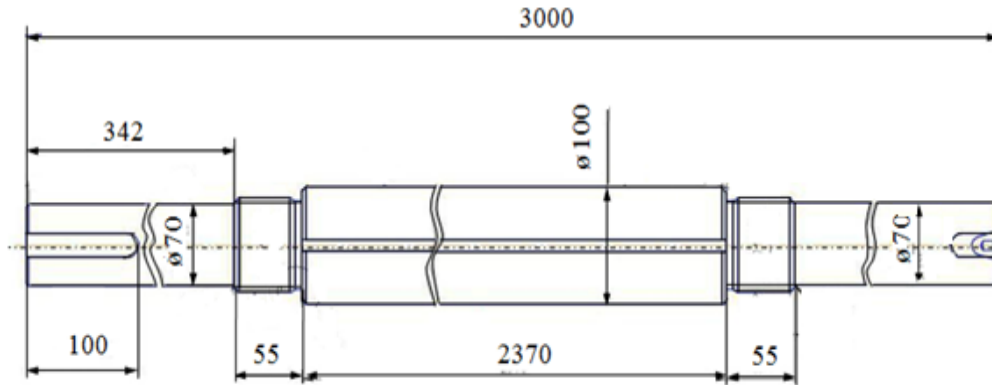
Working drawings of a solid shaft of gin 5DP-130.
